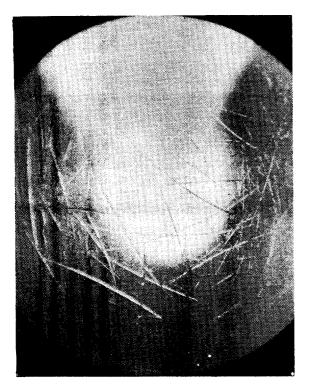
DAMAGE CAUSED BY DIRT The deep scores on this ball (magnification  $\times$  20) were caused by abrasive dirt in the grease.
